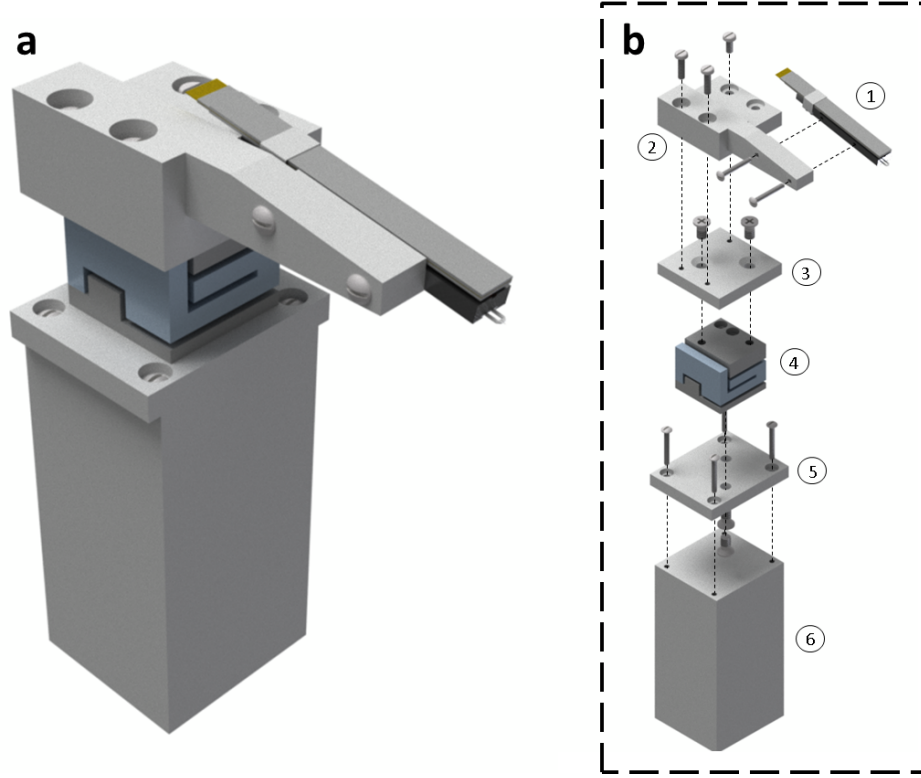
a) Tweezer actuator assembly with 3-axis piezo cube. The tweezer holder is held with a 10.3° down slope to satisfy a clearance criterion of re-entrant windows used in our cryostat. b) exploded view of tweezer actuator assembly. The tweezer holder (1) (shown in fig. 3.4) is attached to a scanning arm (2), mounted to a 3-axis piezo scanner (4) which is attached to a rigid post (6). Between these main components are connector plates (3) and (5) which satisfy the constraints set by the screw placement on the actuator and the post geometry. (2) and (3) could be combined in this architecture, but (2) is designed with screw placements to enable attachment to another piezo stage
